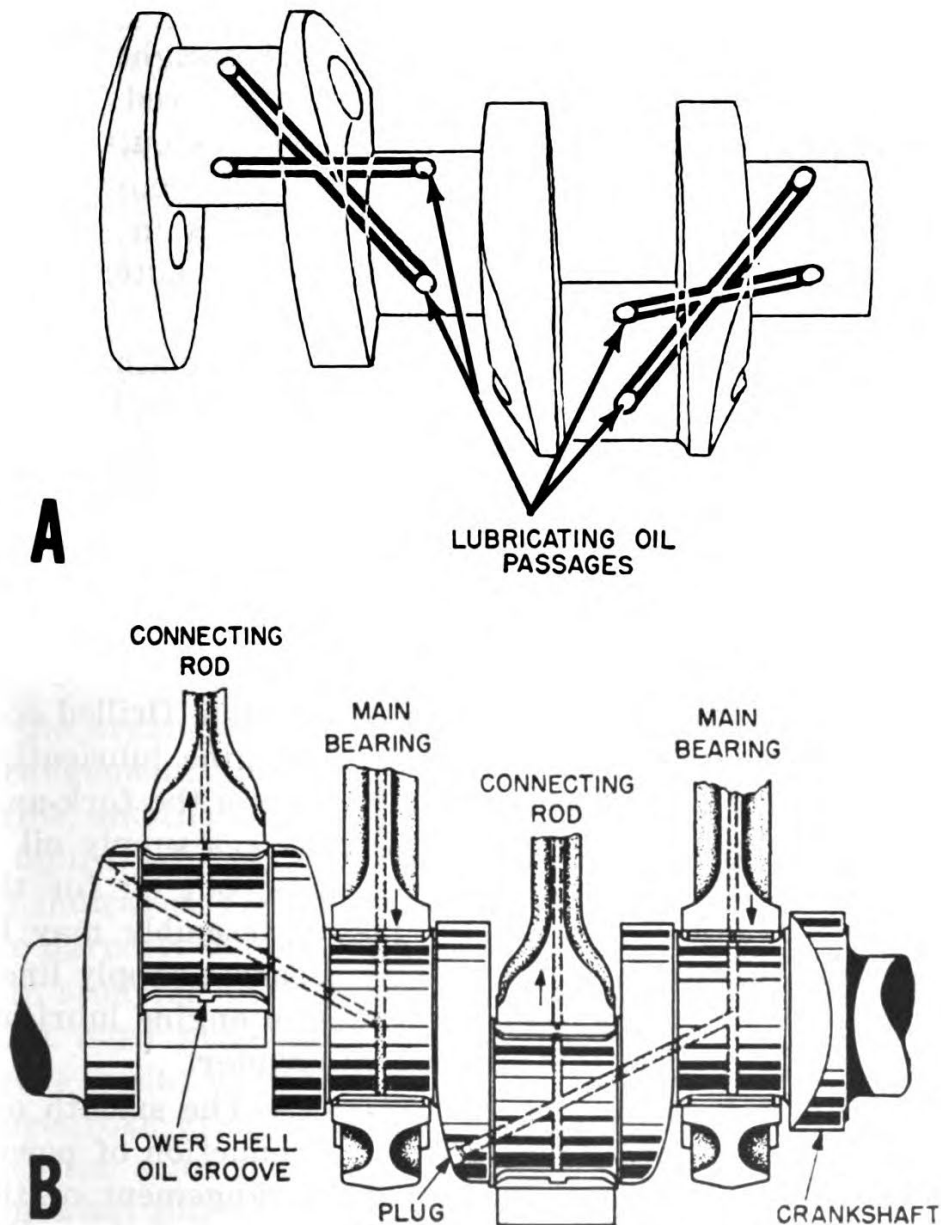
Examples of crankshaft oil passage arrangement.
